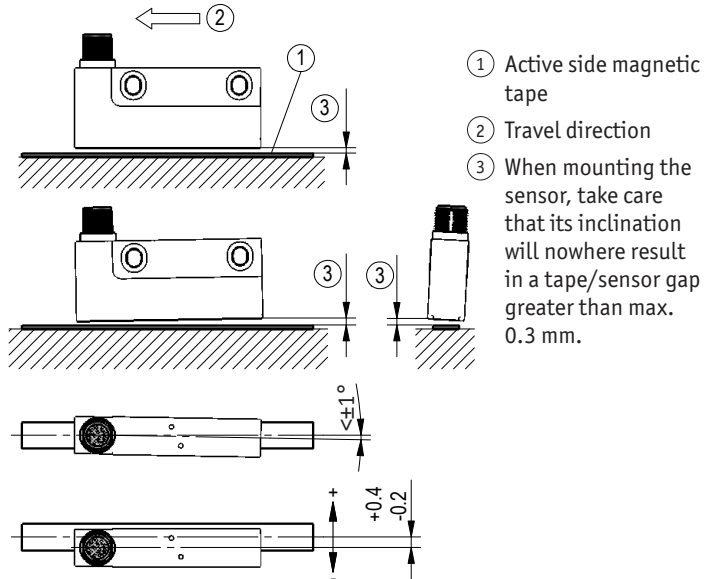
Mounting tolerances, dimensions in mm
